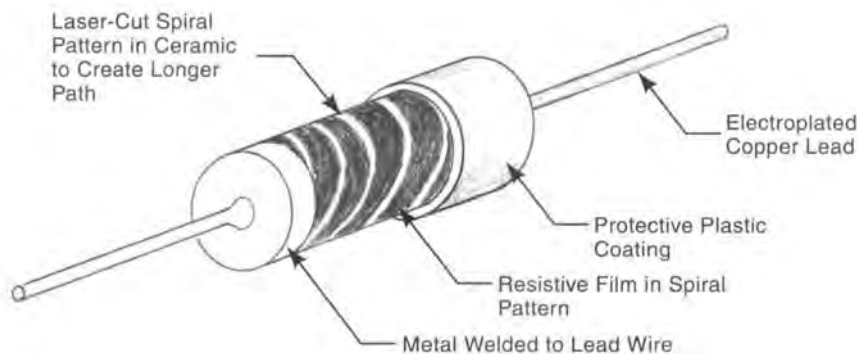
L1 A typical film resistor shown in a cutaway view. The ceramic core is coated with a film of resistive material. A laser cut creates a long spiral electrical path in the film.
